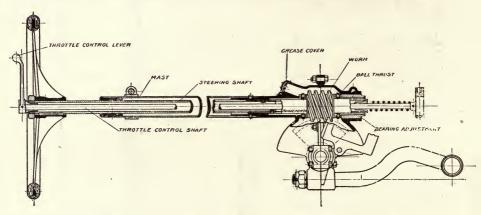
Vulcan Steering Gear. Worm and Sector Type.
